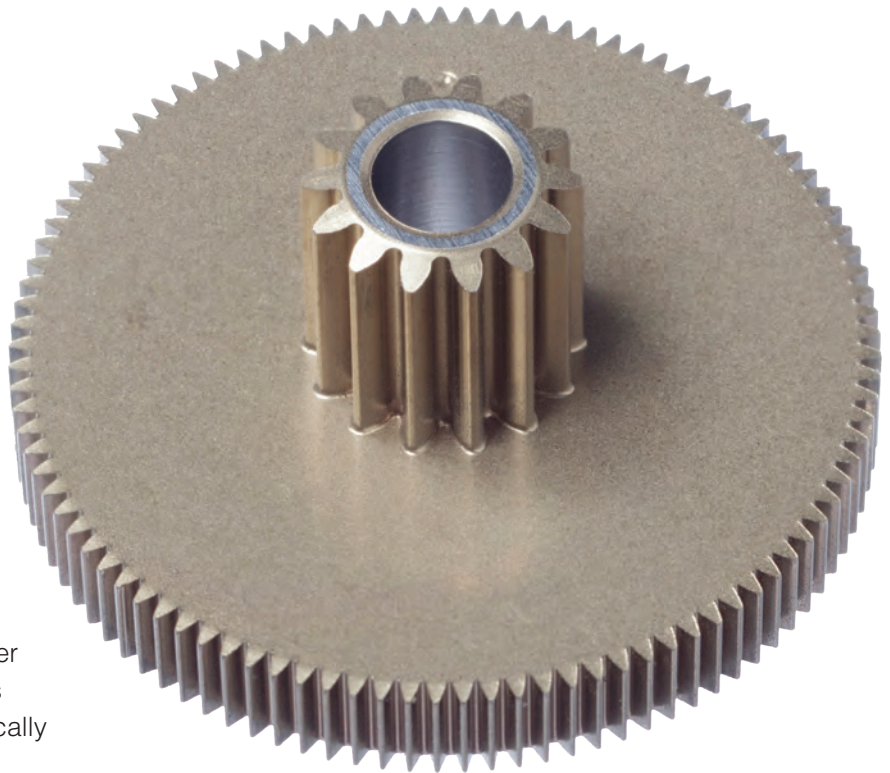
Sintered metal can be used to create complex gear forms—like a recent part that combines 14- and 101-tooth gearing.
